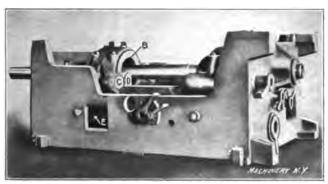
Another View of the Jig in Fig. 185. Note that Holes are Drilled or Bored from All Sides
